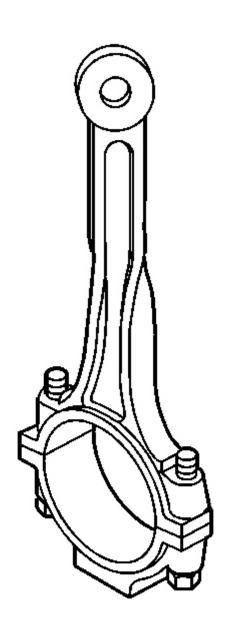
View Of Piston Pin & Connecting Rod Courtesy of GENERAL MOTORS CORP.
